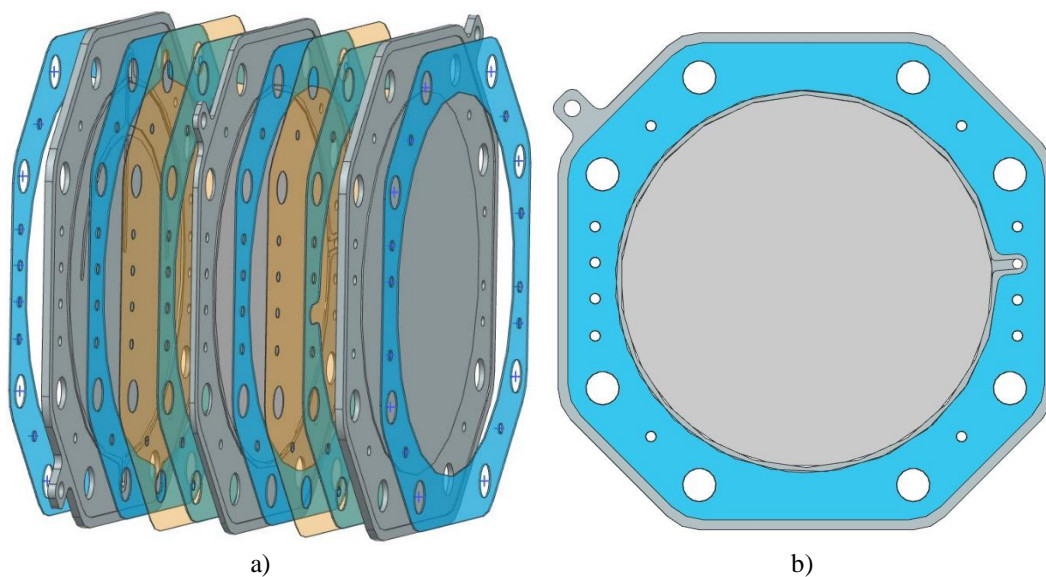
a) Explosion view of one cell. b) Top view of the  $\text{H}_2$  plate with inlaid flat seal.
